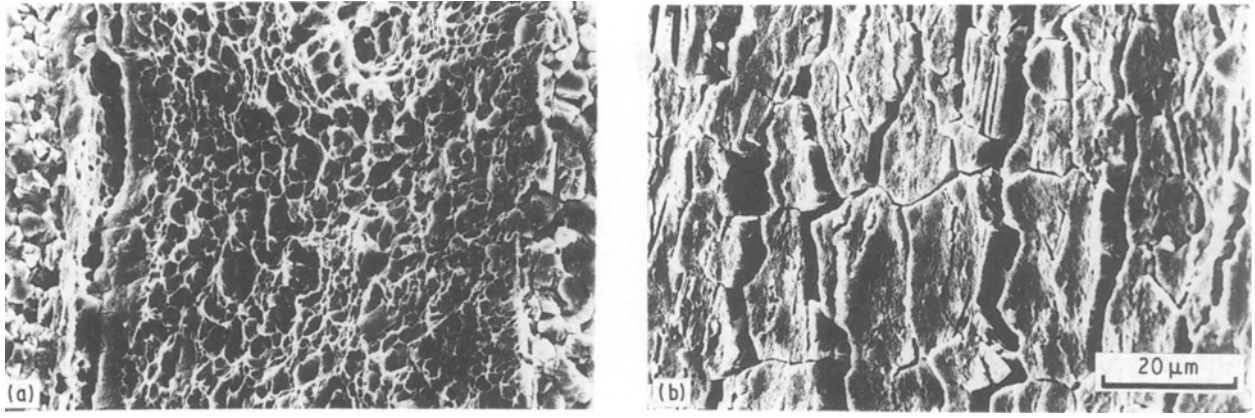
Micrographs of (a) the fracture surface, and (b) the side of the fracture surface of AISI type 347 stainless steel nitrogenized and tensile tested while undergoing cathodic charging.
